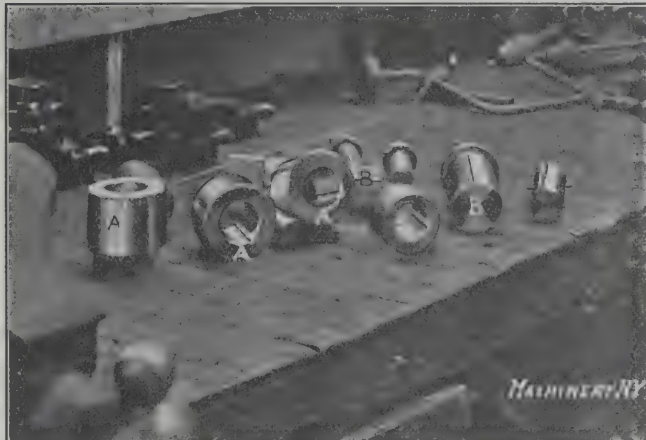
Apron Bushings and Plugs used for Screwing them in.
